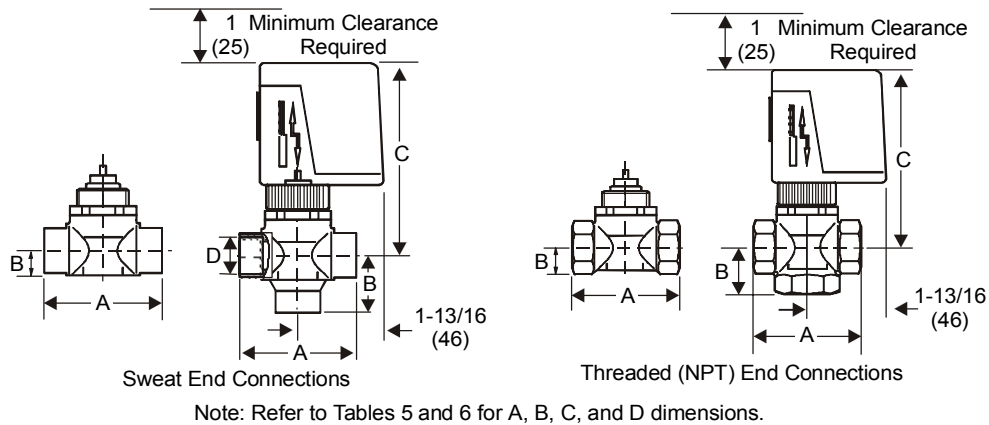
VG5000 Series Valve/VA-7010 Series Actuator Dimensions, in. (mm)
